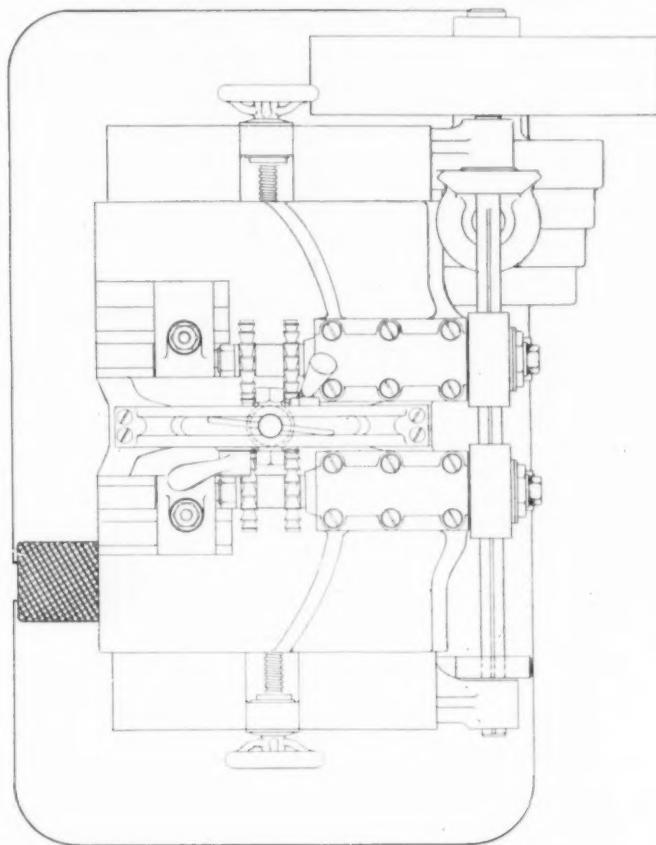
PLAN VIEW OF MACHINE SHOWN IN FIG. 1.
